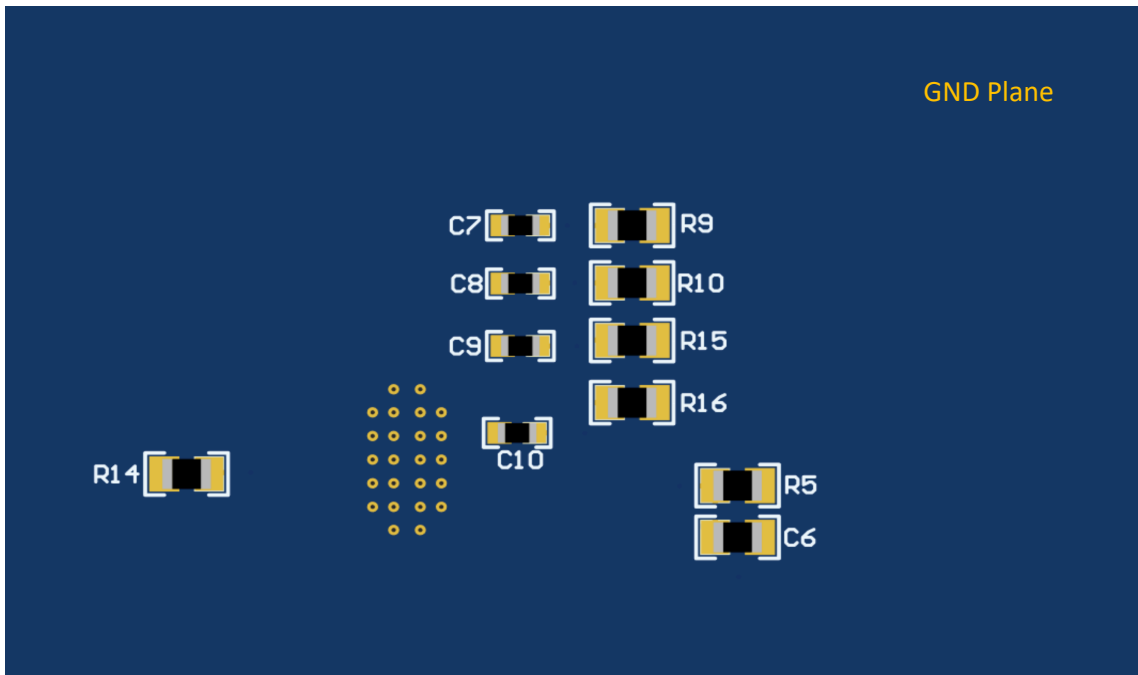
Printed Circuit Board Layout Example: Bottom Layer 3D View
